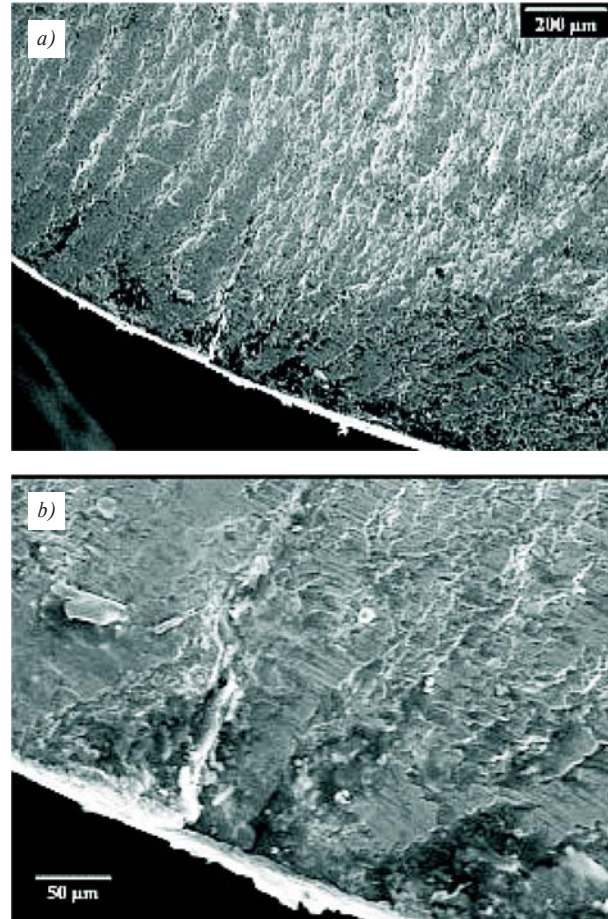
a), b) Row of fine granular inclusions affected the initiation of fatigue fracture, specimen No. P7 cut from the crankshaft
